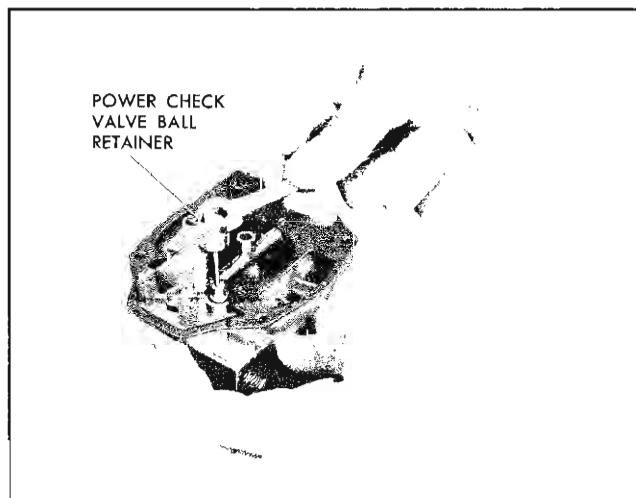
B-22 Removing Power Check Valve Ball Retainer
